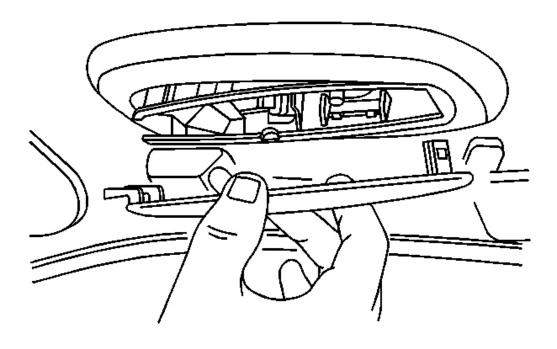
View Of Headliner Lens Courtesy of GENERAL MOTORS CORP.
